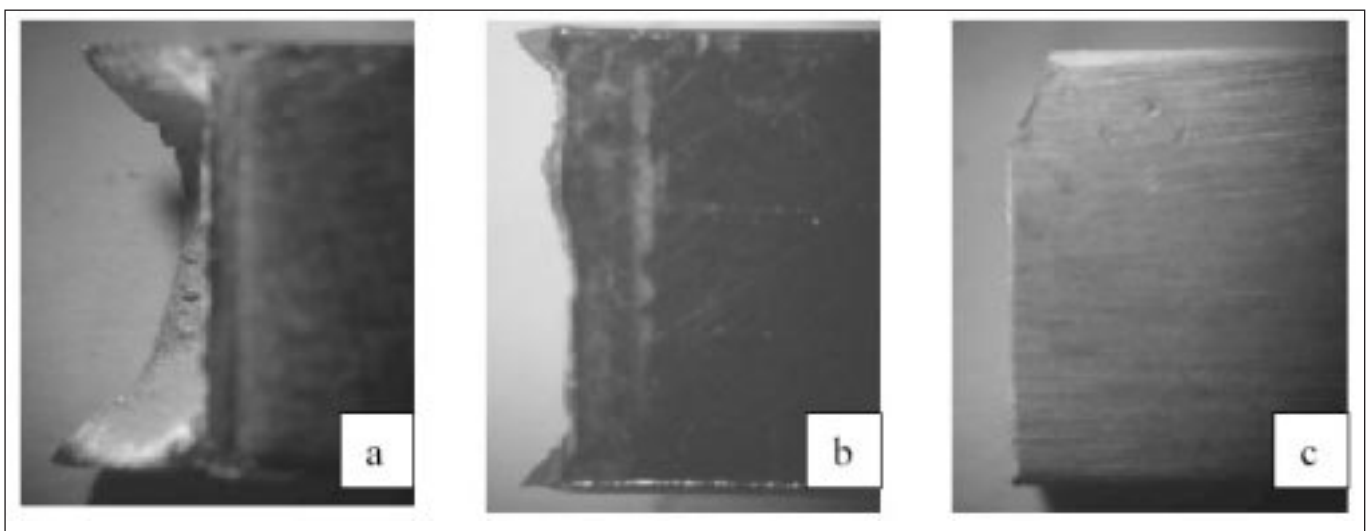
Stereo macrograph of fracture surface (a) Base material, (b) Welded material, (c) Hydrogen charged specimen
